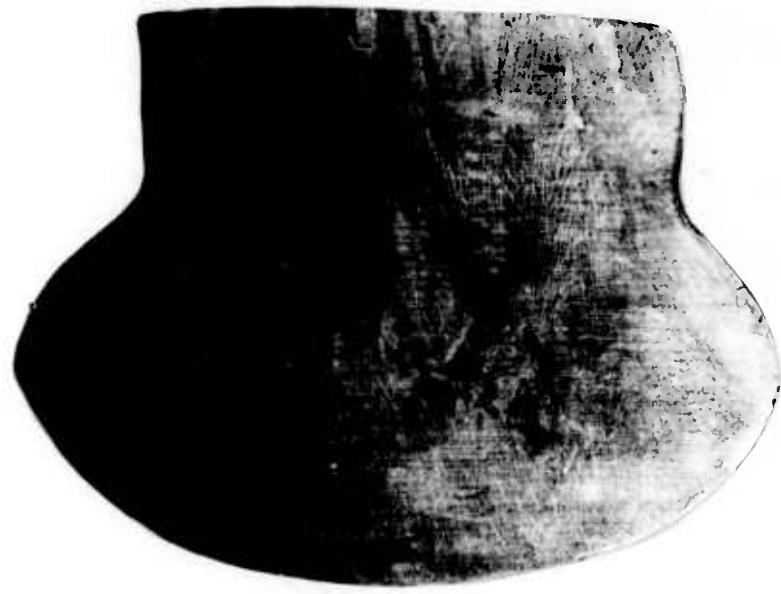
Macroetched Cross Section of Modified Test Casting (full size)
